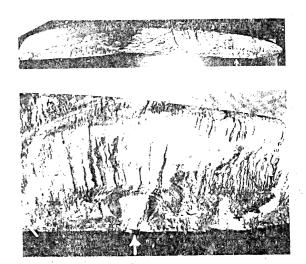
Fatigue failure of a propeller blade which was subjected to tension and one-way bending loads. Arrole indicates crack origin.
